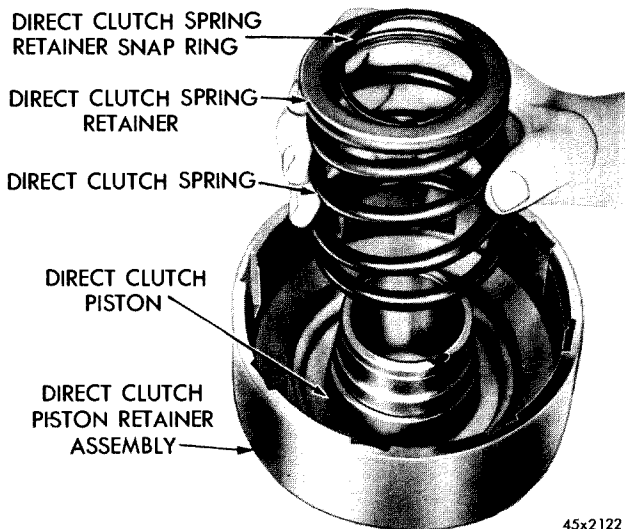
Removal or Installation of Direct Clutch Piston Spring
